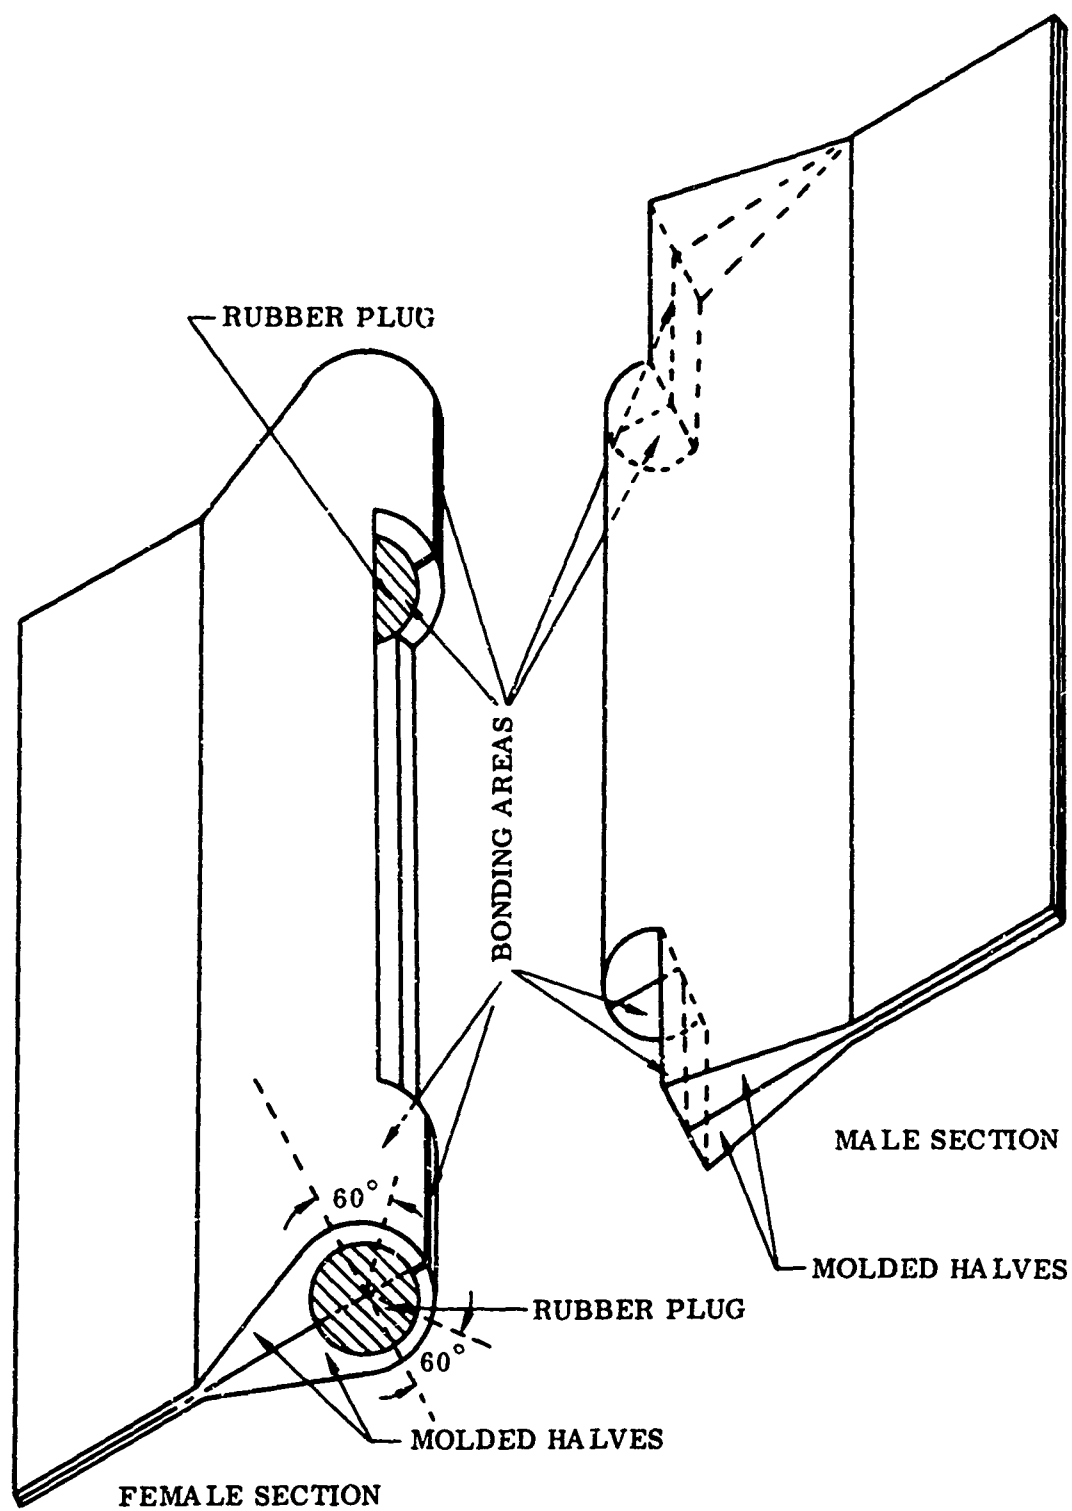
ASSEMBLY OF CLOSURE SEALING SYSTEM
